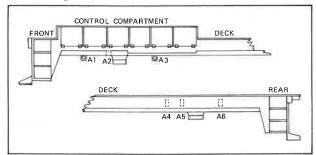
LOCATION OF CMR COILS ON A SIX-MOTOR LOCOMOTIVE.
